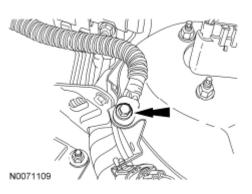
Locating Fuel Tube Quick Connect Coupling Courtesy of FORD MOTOR CO.
